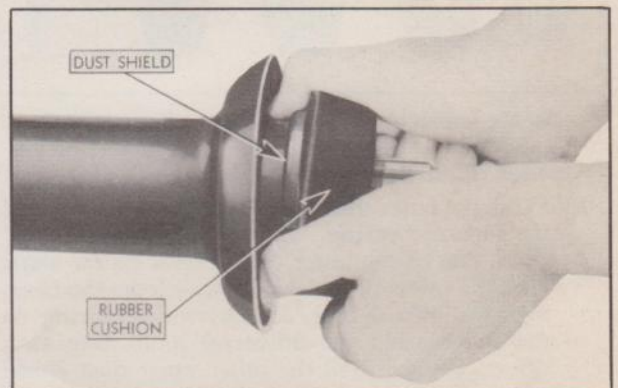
Removing or Replacing Bearing Rubber Cushion
